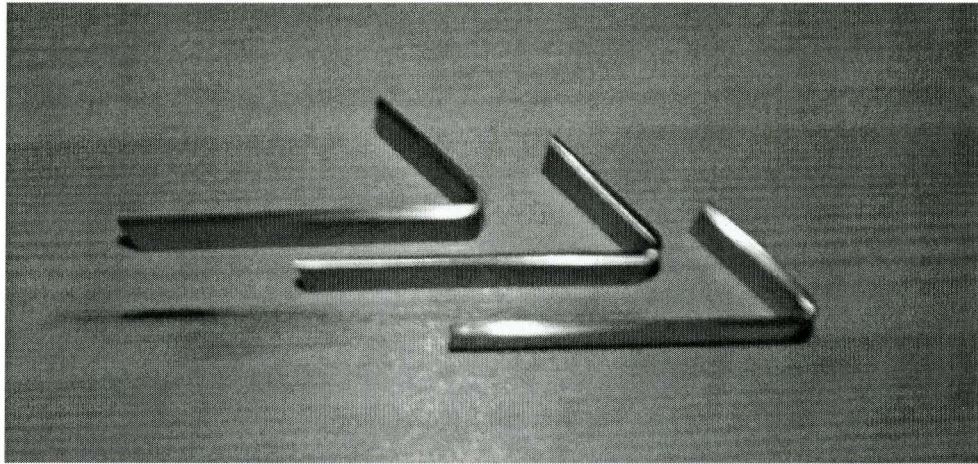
DP780 experimental samples bent in the commercial bending machine.
